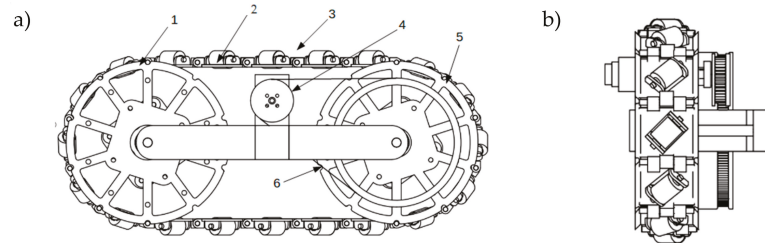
View of the continuous track system with multidirectional tracks: (a) side view and (b) front view (1—idler, 2—link with a rolling roller, 3—track, 4—motor pulley, 5—drive wheel, 6—toothed belt).
